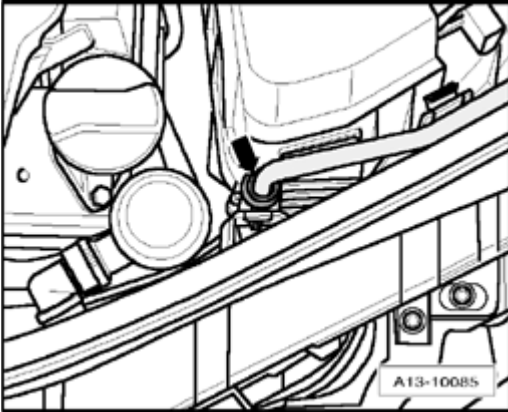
Auxiliary Cooler Air Duct Bolt & Electrical Connector
